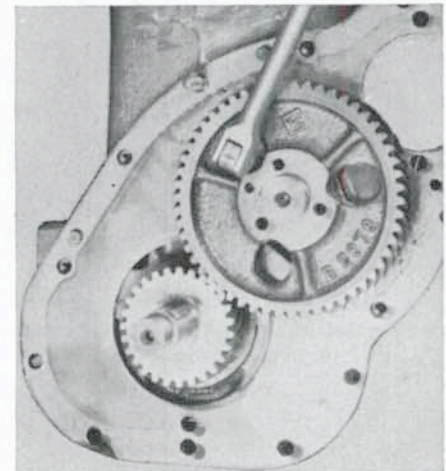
Removing the camshaft thrust plate retaining cap screws. (Although a WD45 diesel engine is shown the method is the same for D-15 and D-17 diesel models.)
